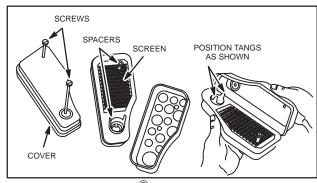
OIL-FOAM[®] AIR CLEANER, VERTICAL CRANKSHAFT
